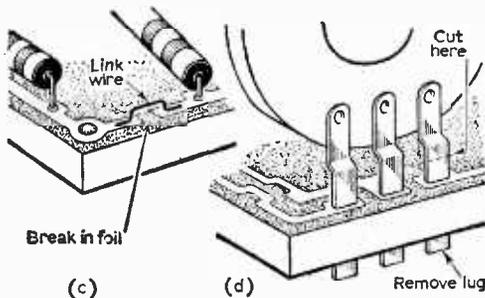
Bridging a crack in printed circuit "wiring".
